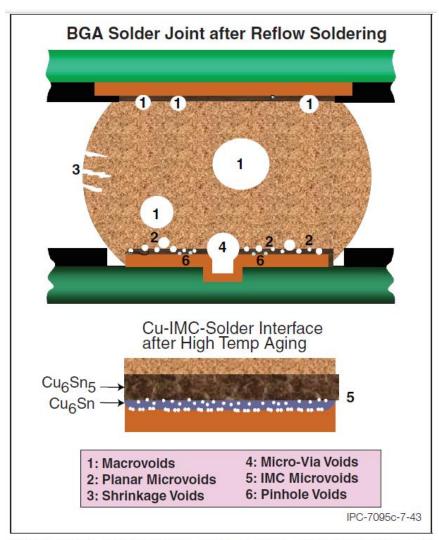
Typical Size and Location of Various Types of Voids in a BGA Solder Joint
